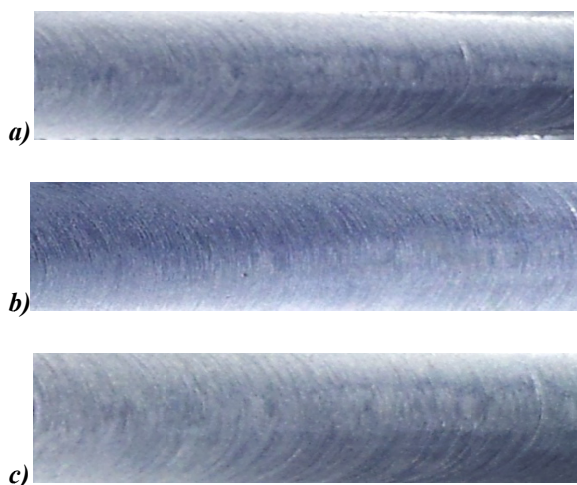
Macrographs of specimens processed with FSP under flood cooling condition with different tool-pin profiles (a) square tool, (b) hexagonal tool, (c) round tool.
